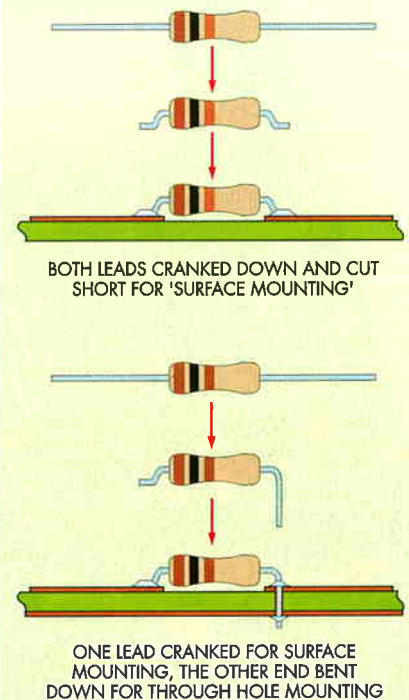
the leaded resistors are soldered to the PC board as shown here.
